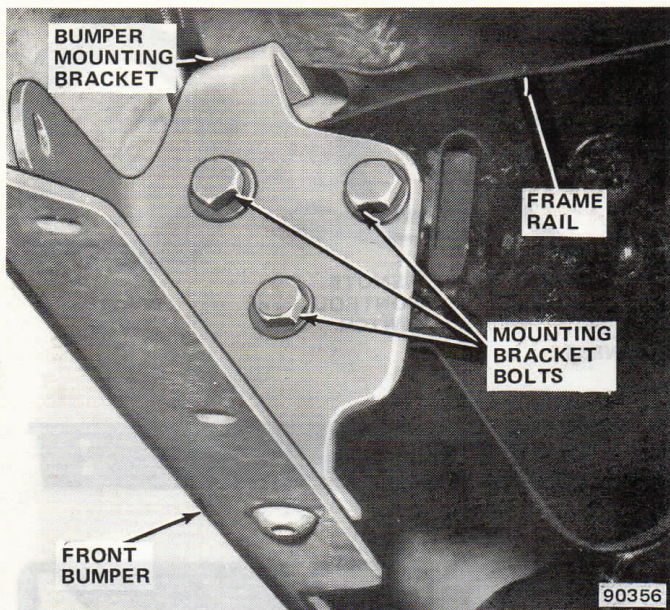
Front Bumper Mounting Bracket Bolt Location
